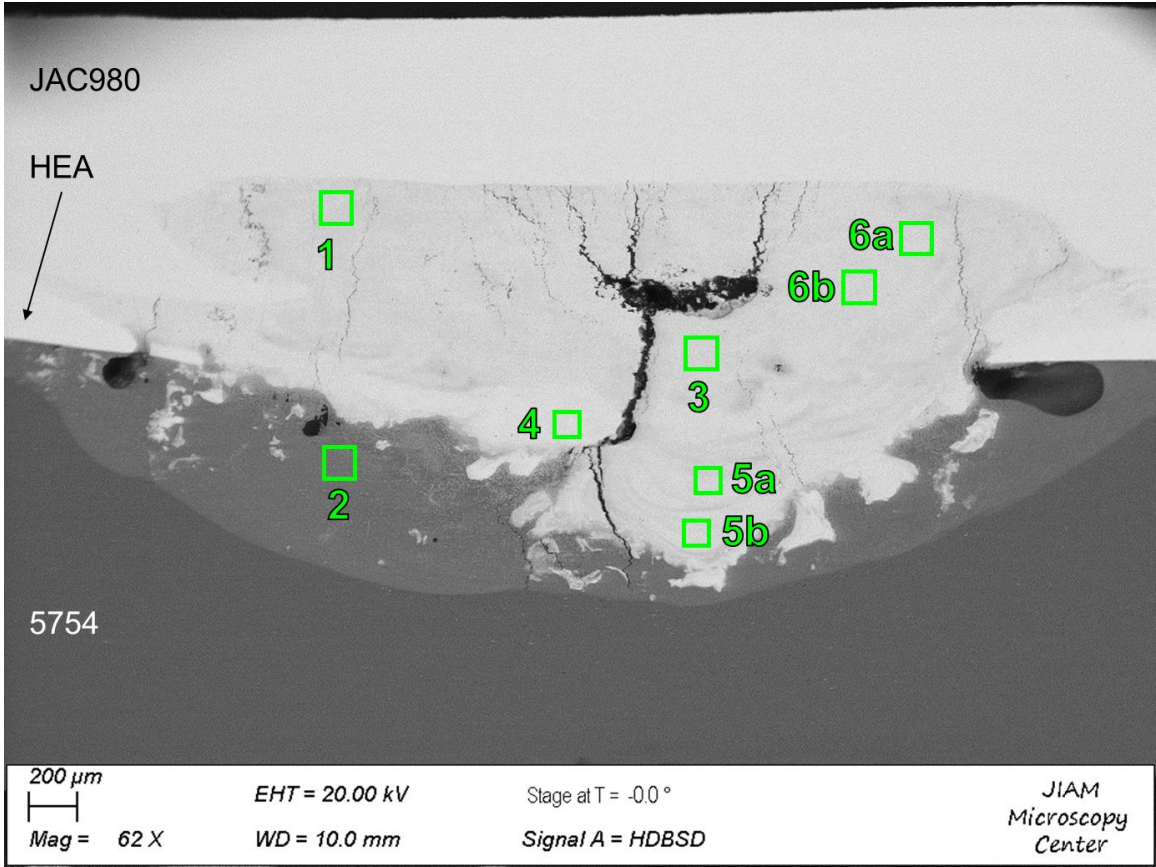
Appearance of the JAC 980 steel – HEA – 5754 aluminum welding joint.
